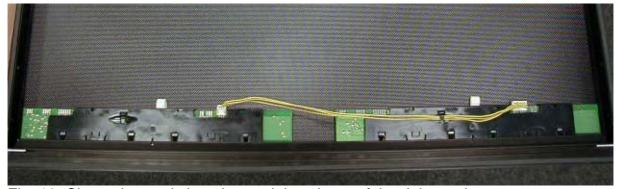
Clamp the cords into the retaining clamp of the right carrier.
